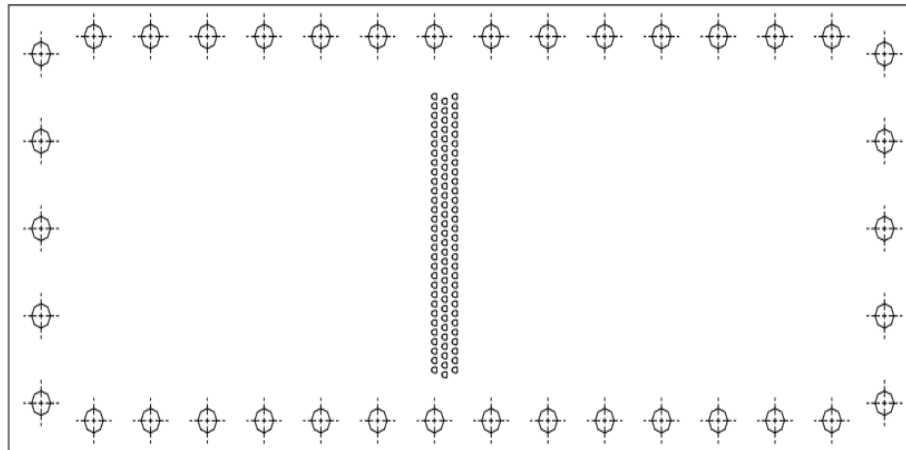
The layout of LPBF fabricated sheet with fan-shaped cooling hole
